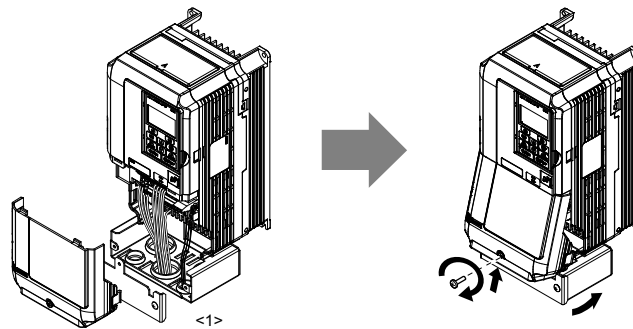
Reattaching the Terminal Cover on an IP20/NEMA Type 1 Enclosure Drive
